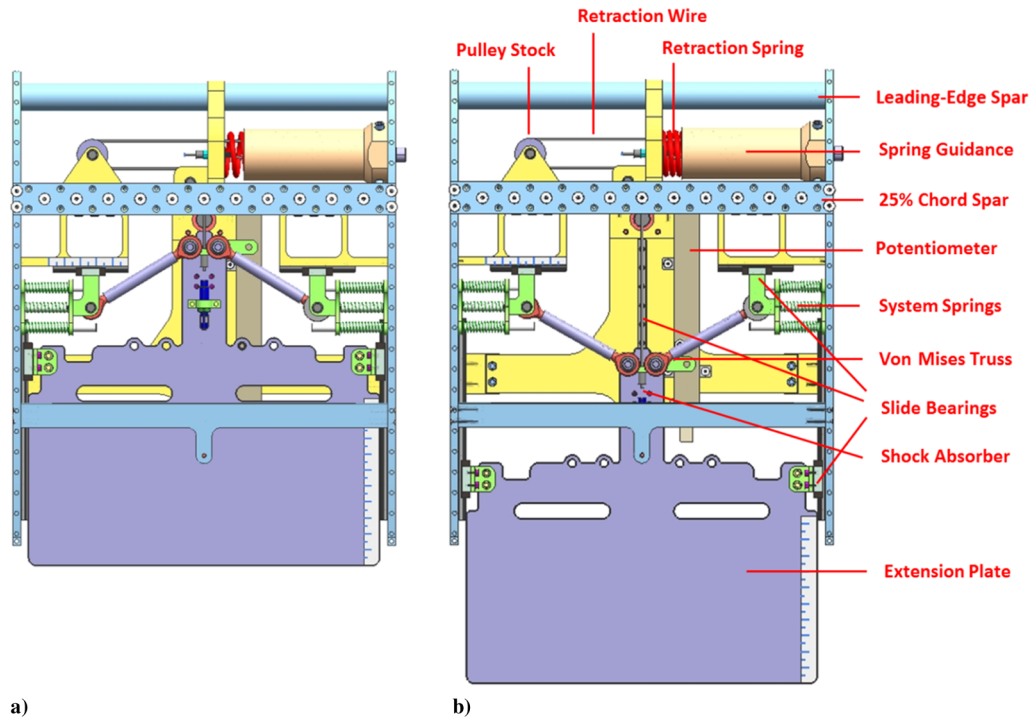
CAD drawing of prototype with various components shown (top view, skin removed).
